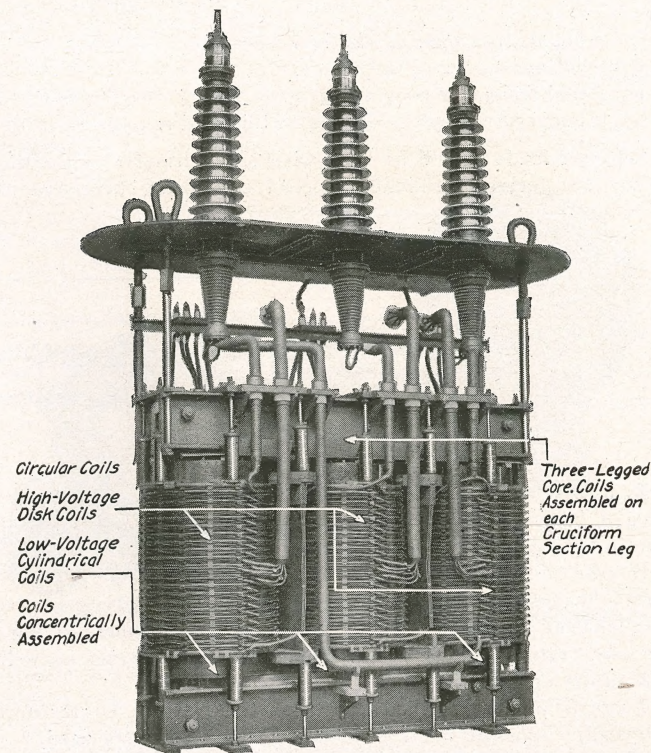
THREE-PHASE DISK CYLINDER, COIL DESIGN, USING THREE-LEGGED CORE
